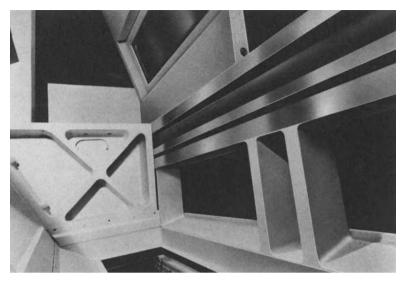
The rib and boxlike construction of the castings. [Courtesy of Cincinnati Milacron.]
